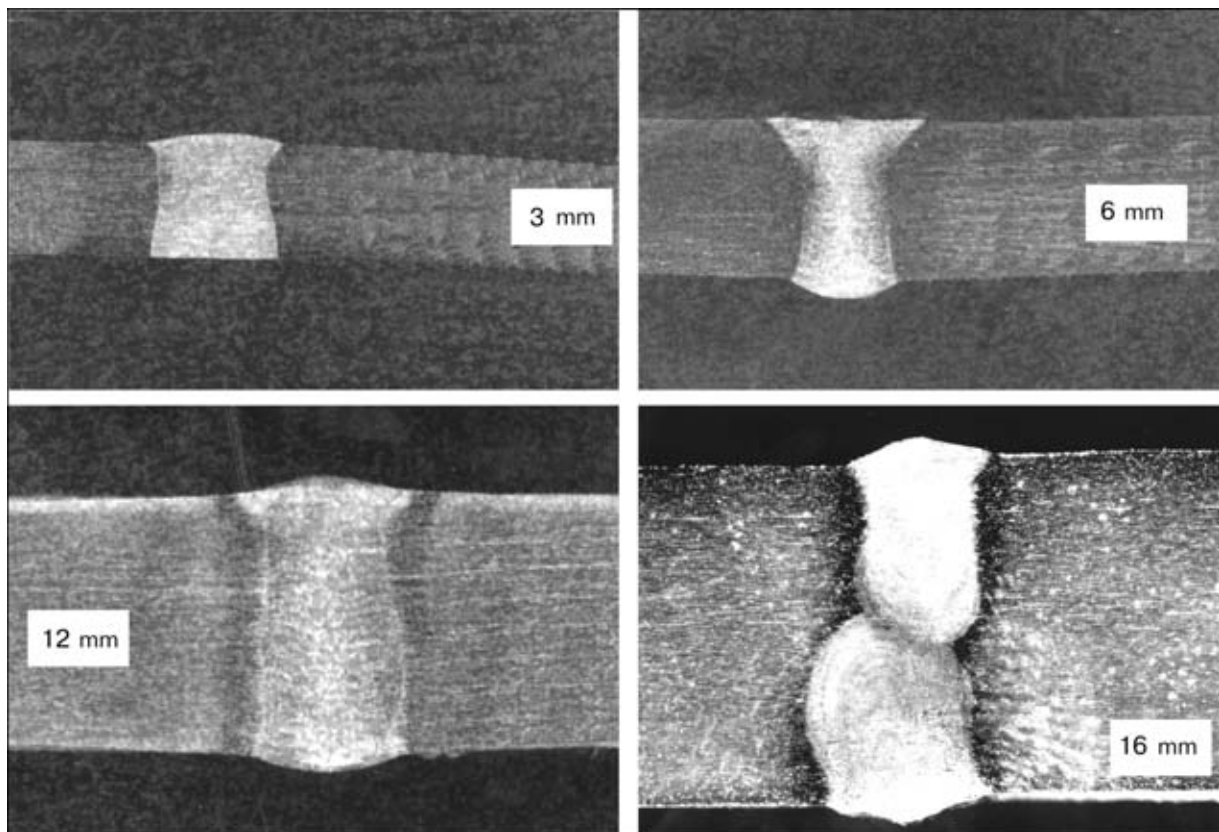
Macrosections of the A-TIG welded joints in steel 301L of different thickness
